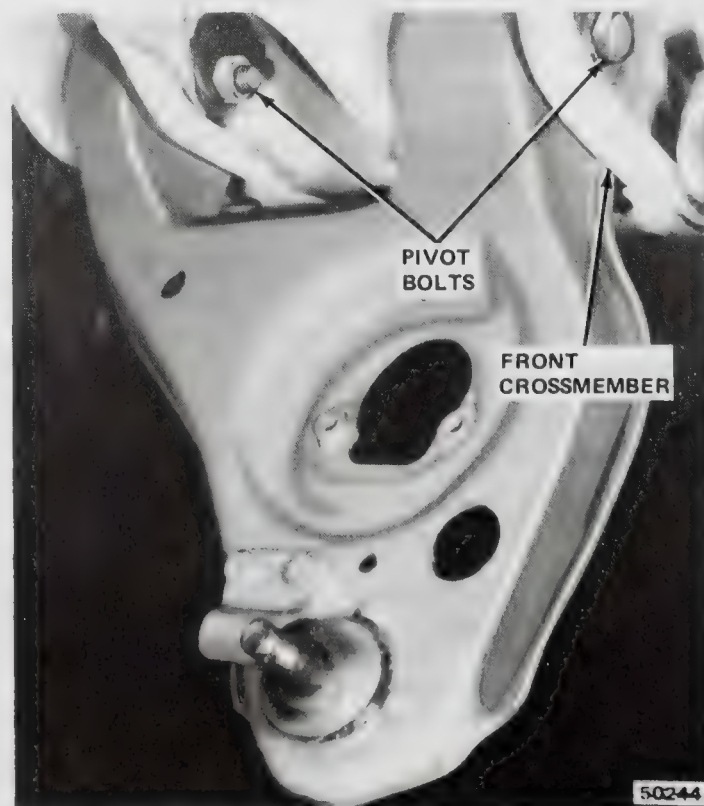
M-40 Lower Control Arm Pivot Bolt Location
